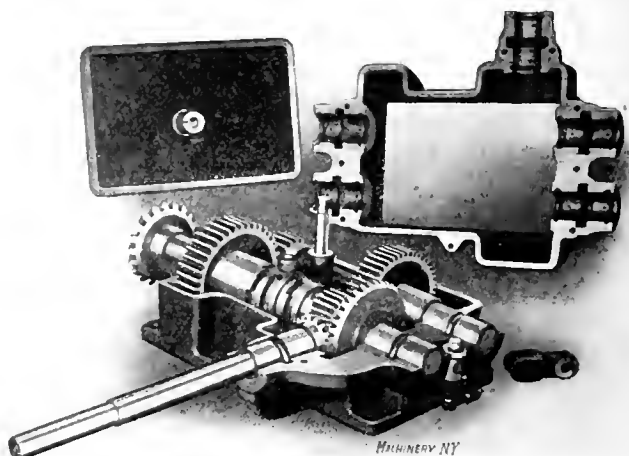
Speed Box, showing Enclosed Mechanism and Ring Oiling Bearings
